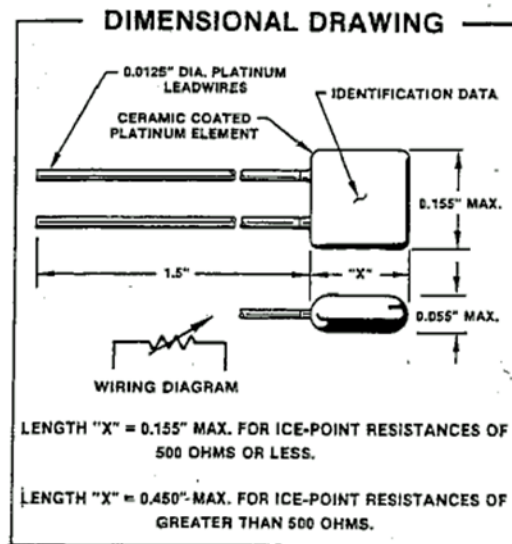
Dimensional Drawing of Platinum Sensors for HCE
